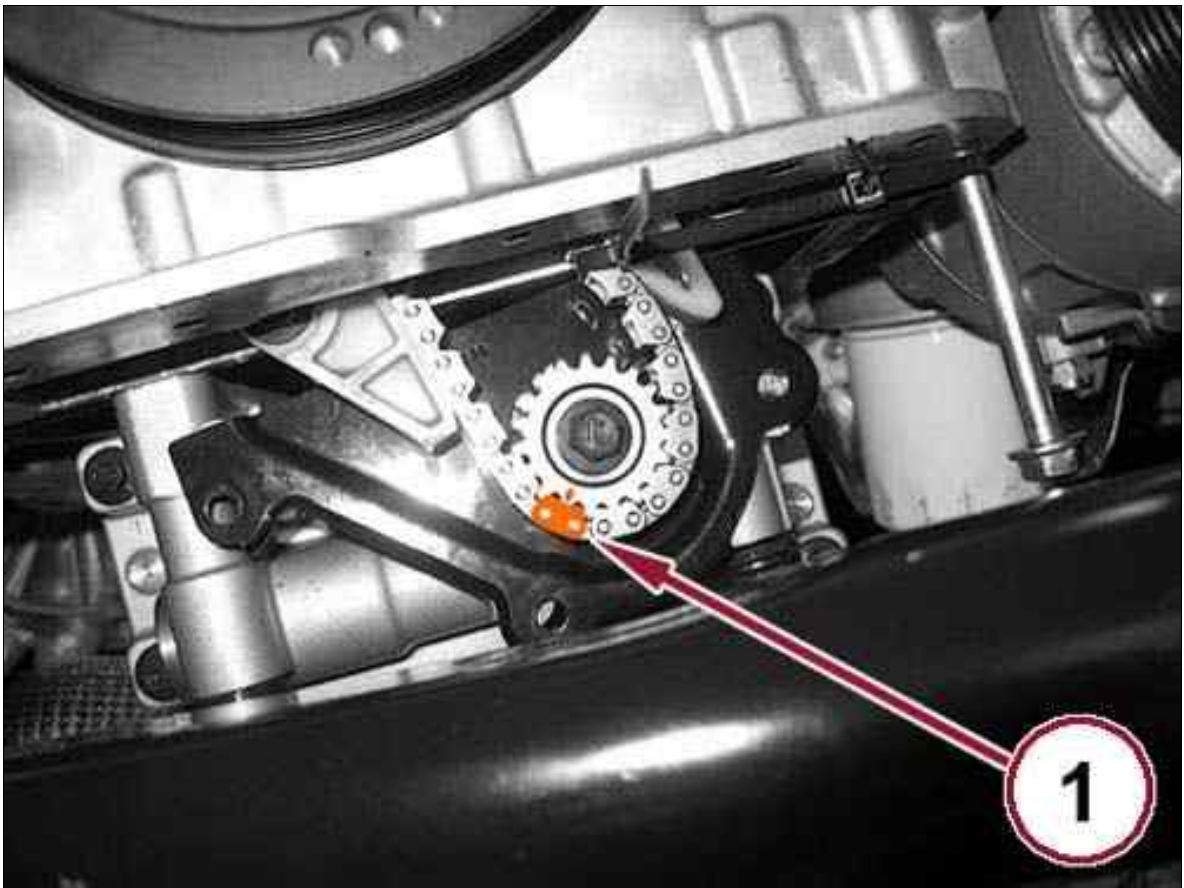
Oil Pump - Balancing Assembly Bolt Tightening Sequence
